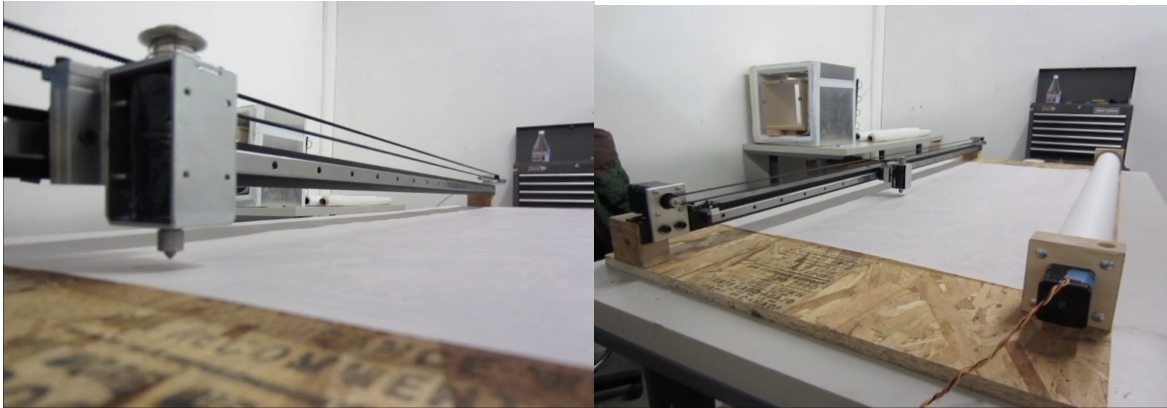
Prototype machine, punching mechanism, Seattle in 2013
